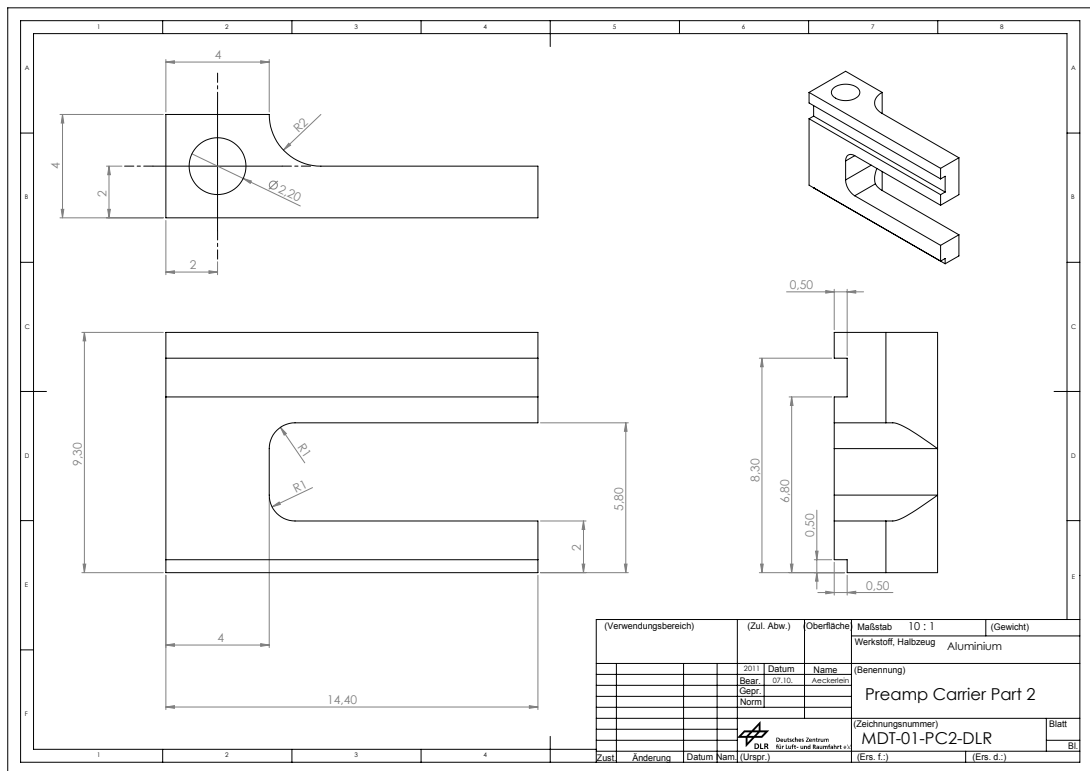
Technical drawing of the MDT-01-001 case – front end carrier II (Section 3.5.2).
